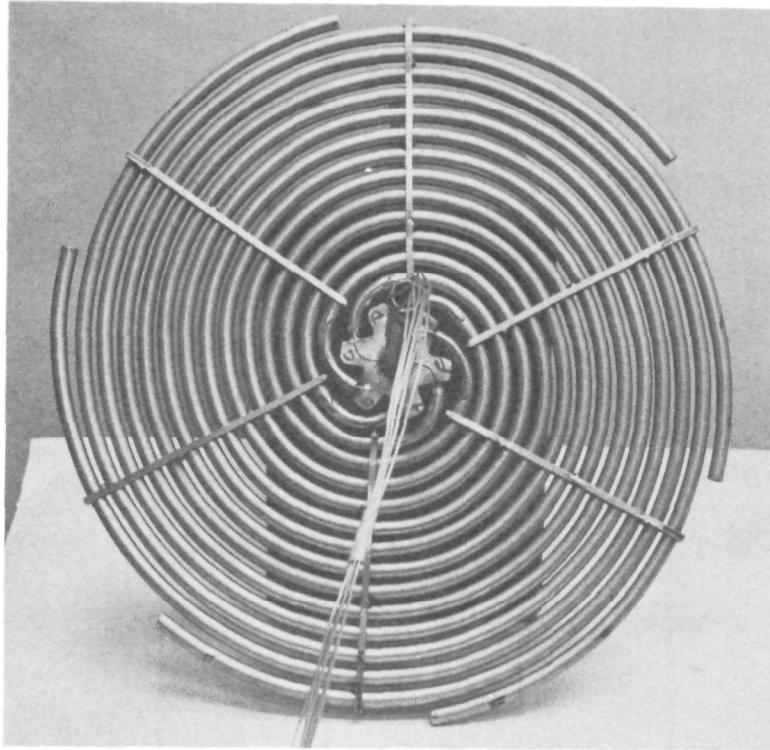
SUPERHEATER OUTLET ROW SHOWING THE SIX THERMO-
